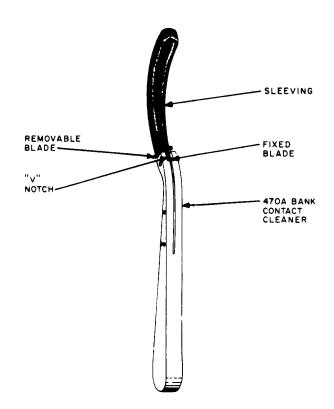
Removable Blade of 470A Bank Contact Cleaner Inserted in "V" Notch
